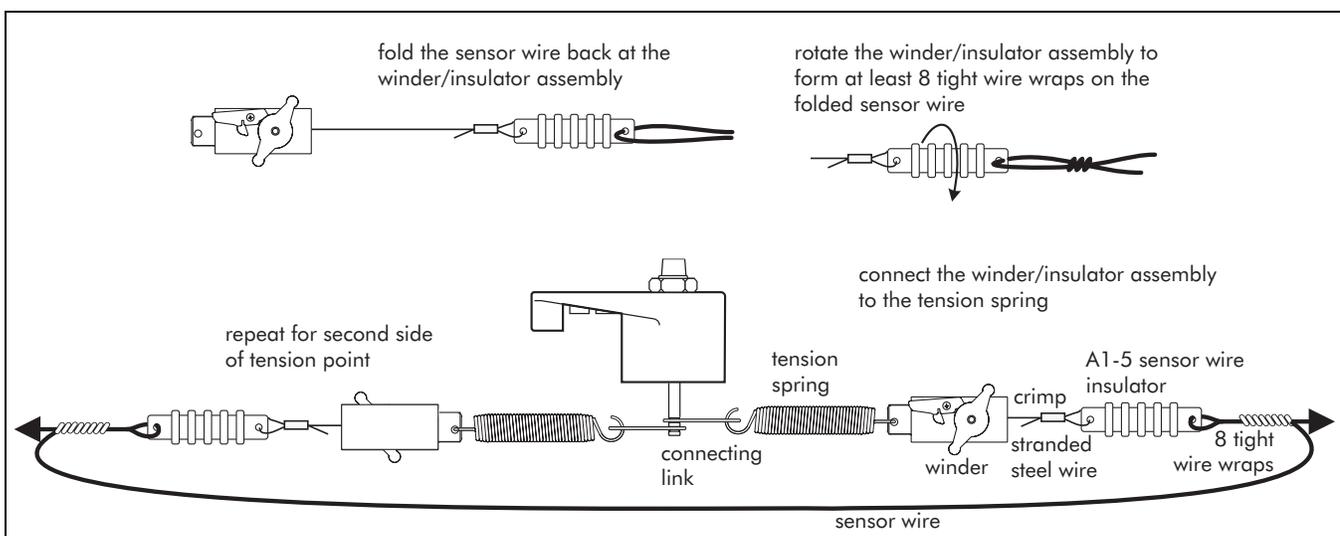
Connecting the sensor wire to the winder/insulator assembly
